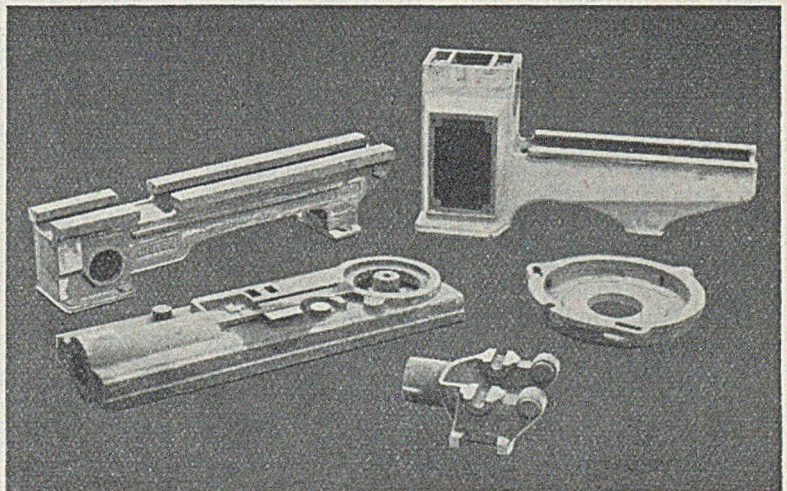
Typical Machine Tool embodying Castings produced by Technaloy, Limited.
